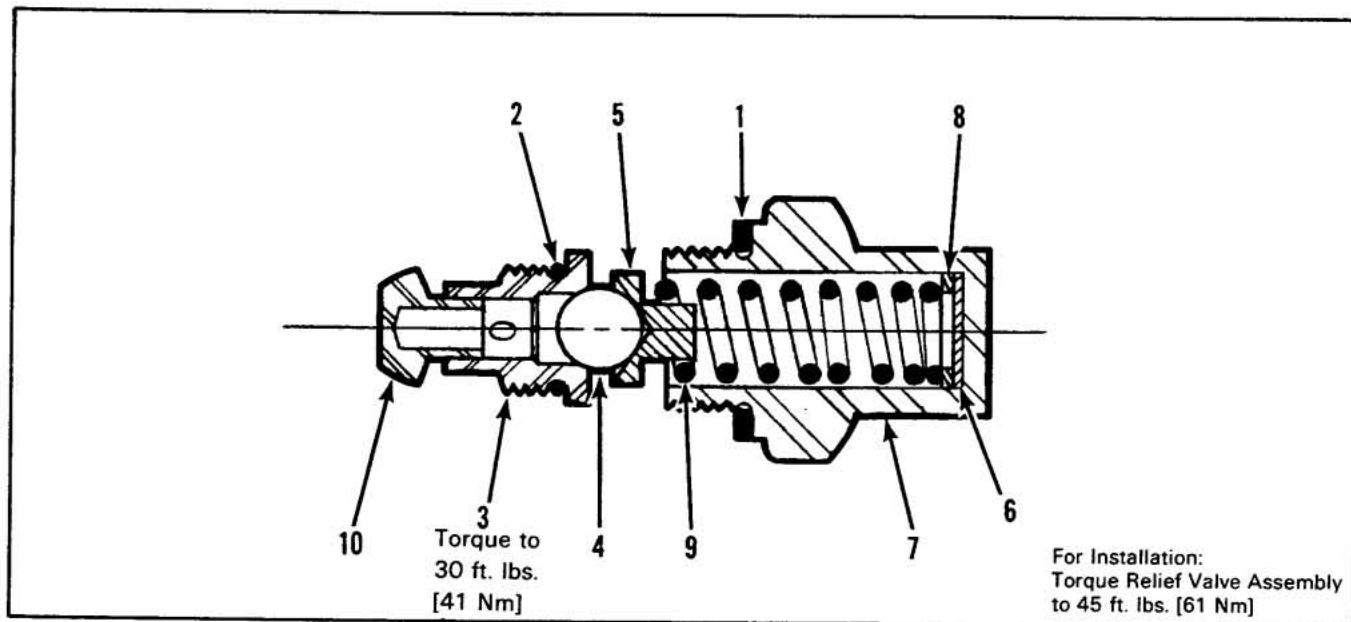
Model J-NJ Non-Adjustable Relief. (Standard) 500-1500 PSI [34-103 bar]
